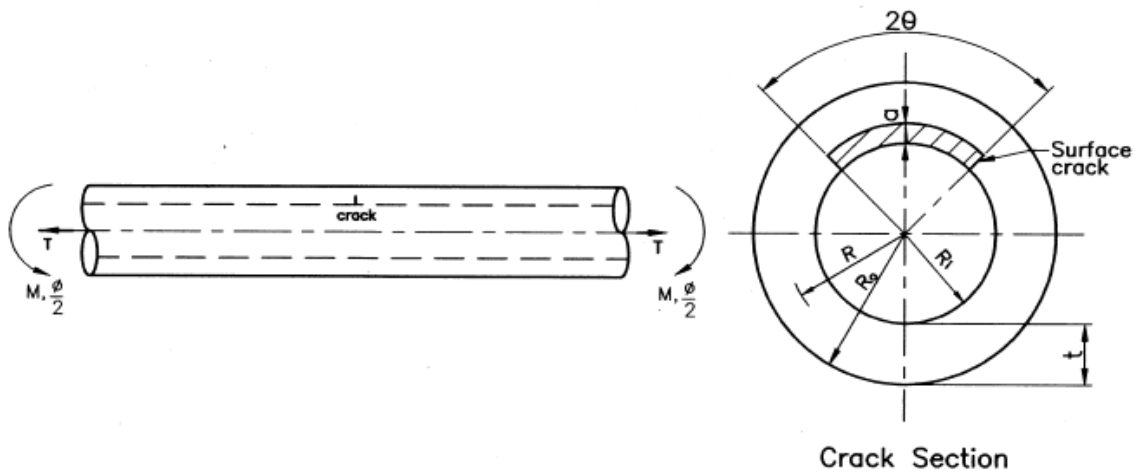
Pipe with constant depth part-through circumferential crack under combined bending and axial tension
